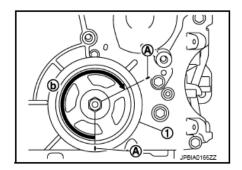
Identifying Crankshaft Pulley Mounting Bolt Tightening Torque
